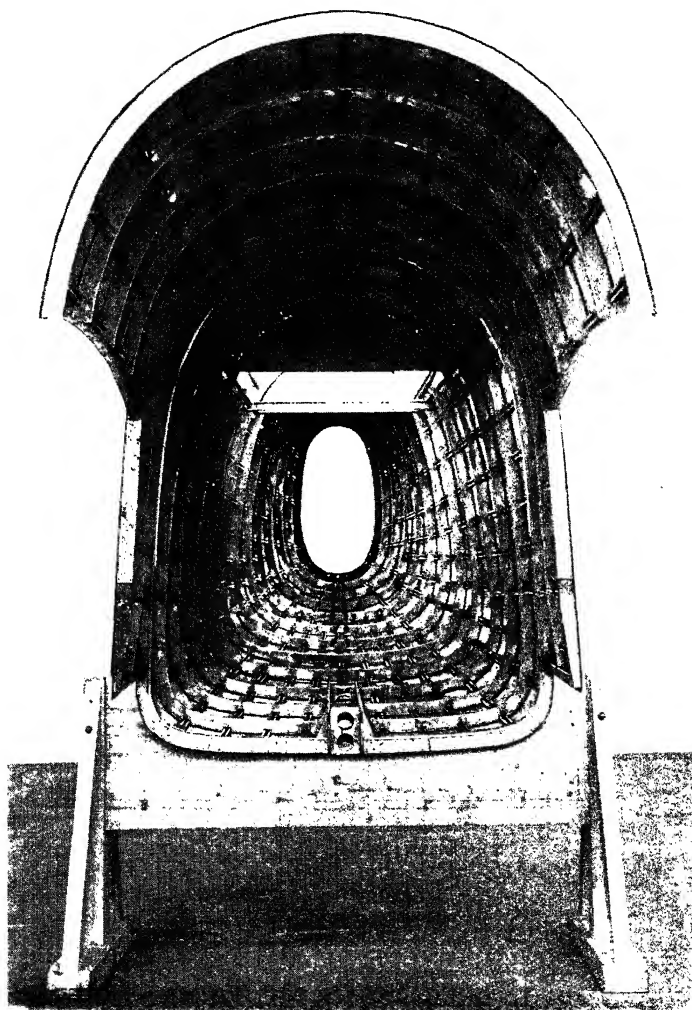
THE MONOCOQUE FUSELAGE OF THE "BRISTOL" BLENHEIM BOMBER, SHOWING REAR SECTION WITHOUT "NOSE."
